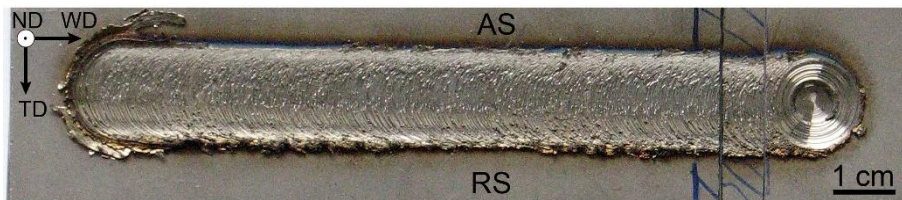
Photograph of the weld surface appearance. The welding reference frame are: welding direction (WD), transverse direction (TD), and normal direction (ND). Advancing side (AS), and retreating side (RS) are indicated.
